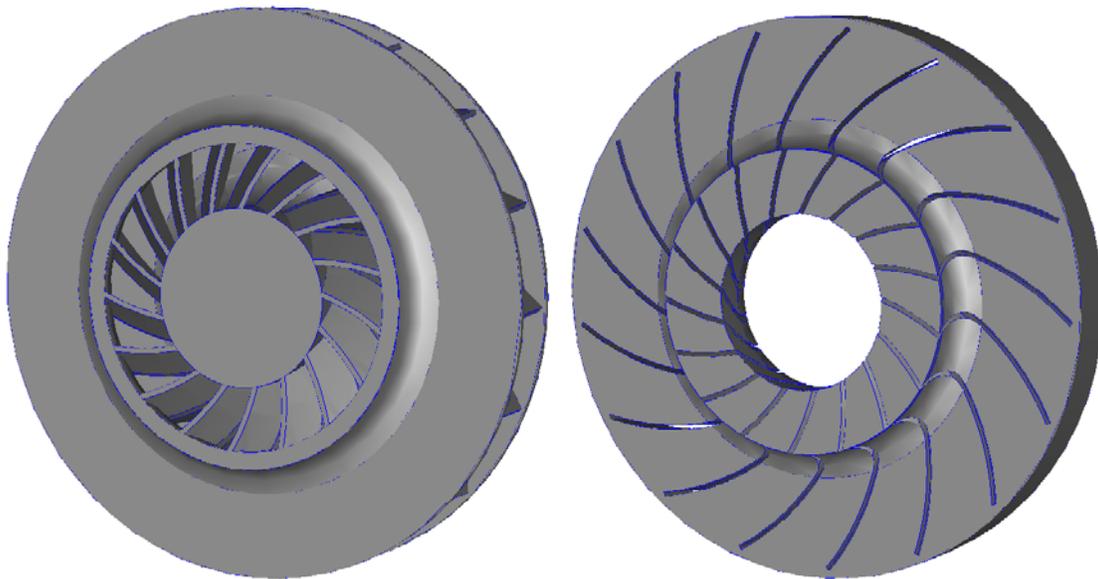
Three-Dimensional Impeller Geometry Used for CFD Analysis
